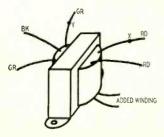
Coded transformer terminals insure proper connection to the counter.
